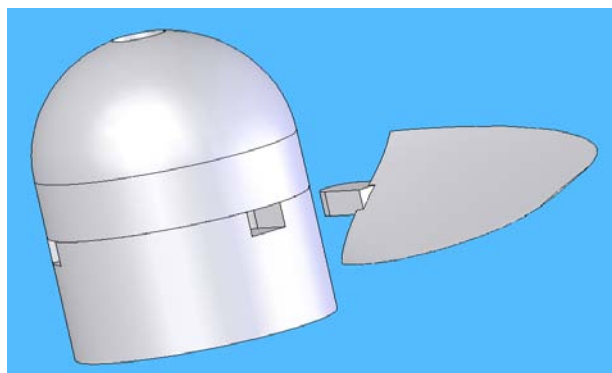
Assembly of designed components of AUV propeller to be forged
